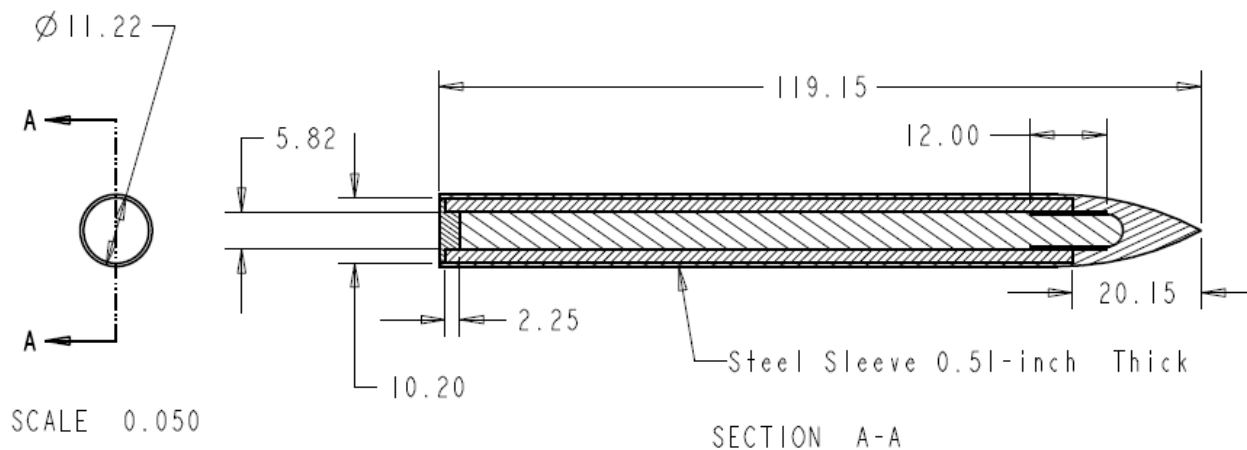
Penetrating bomb design with external steel sleeve.
